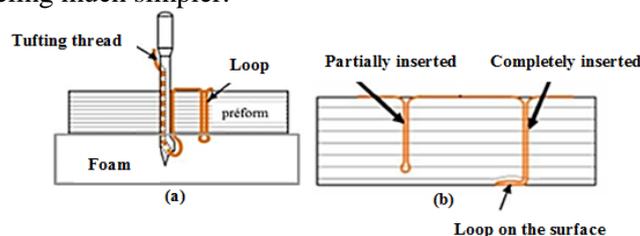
Illustrations of (a) tufting technology (b) partial & global-tufting [36].
